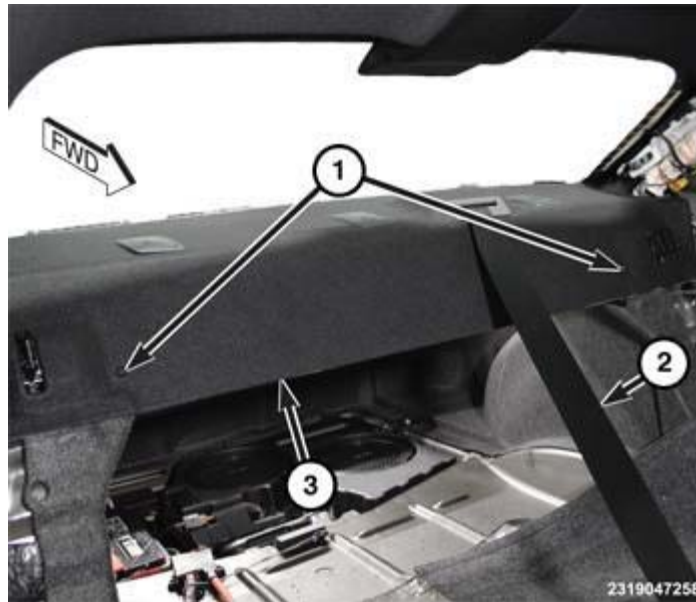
Push Fasteners, Rear Seat Belt & Rear Shelf Trim
